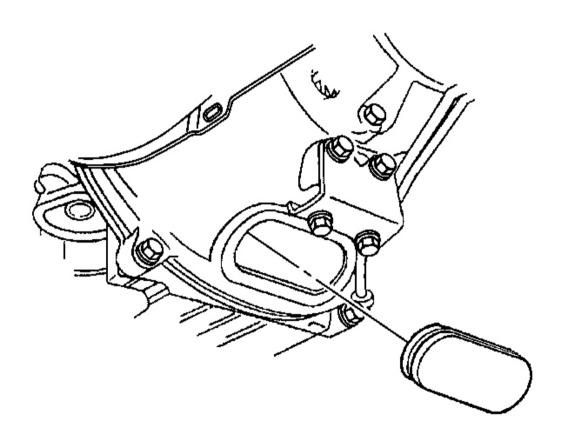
Engine Flywheel Housing Access Plug Courtesy of GENERAL MOTORS CORP.
